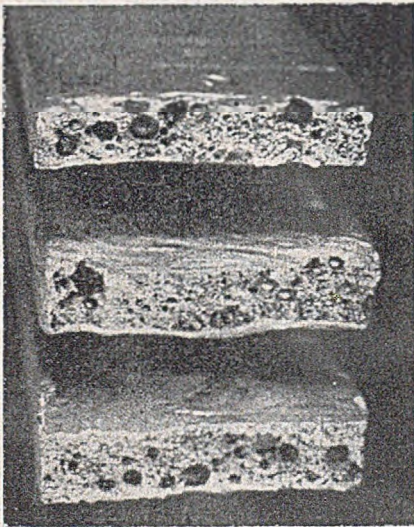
Typical fractures through welds carried out with moist electrodes coated with a gas welding flux.
